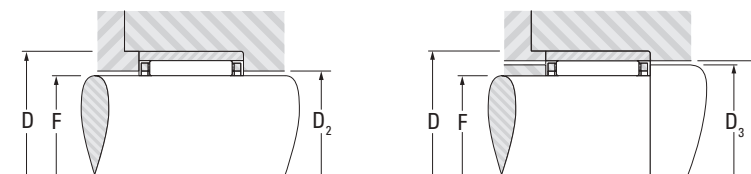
Guidance in the housing (left) and on the shaft (right)
